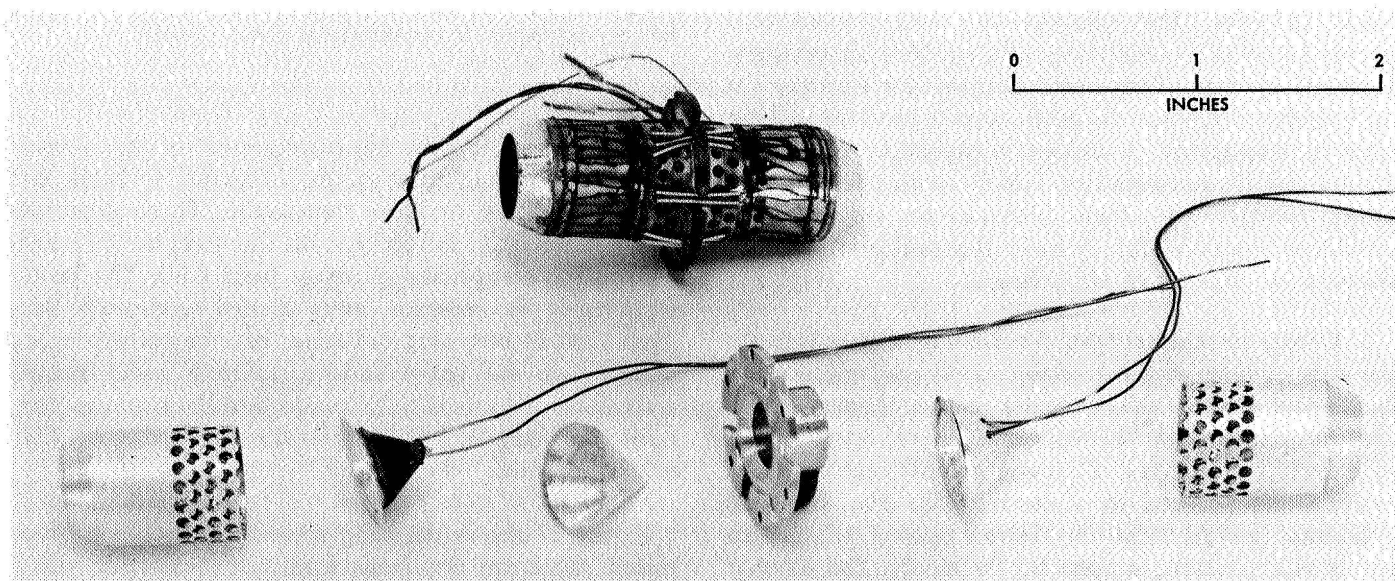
Photo of cavity assembly and exploded view of cavity parts
